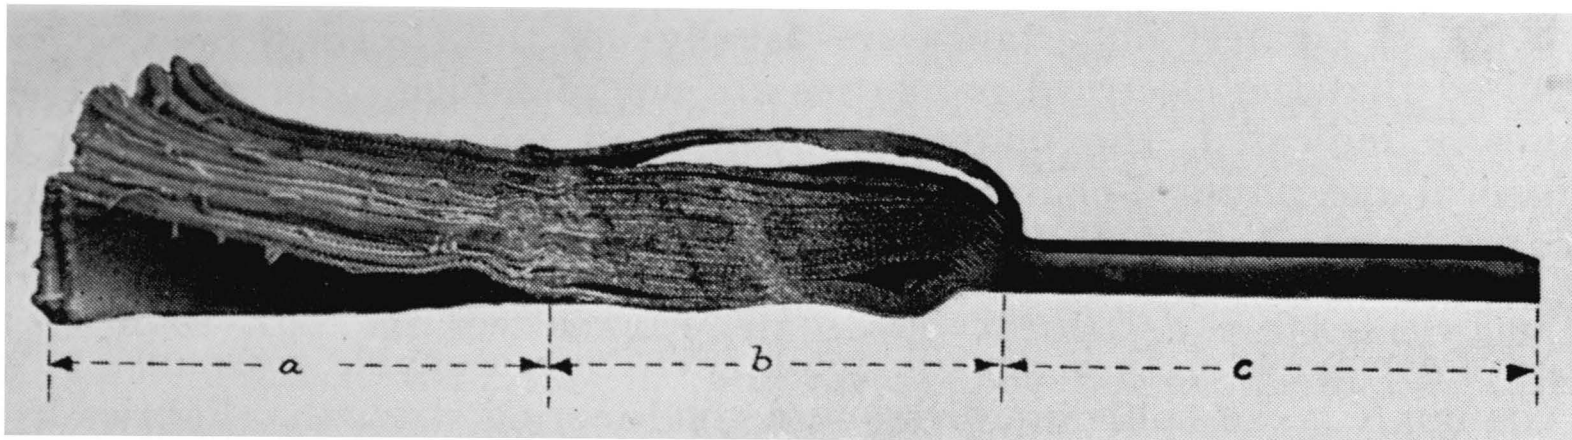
Synthetic resin bonded fabric compound sample showing stages of manufacture.
